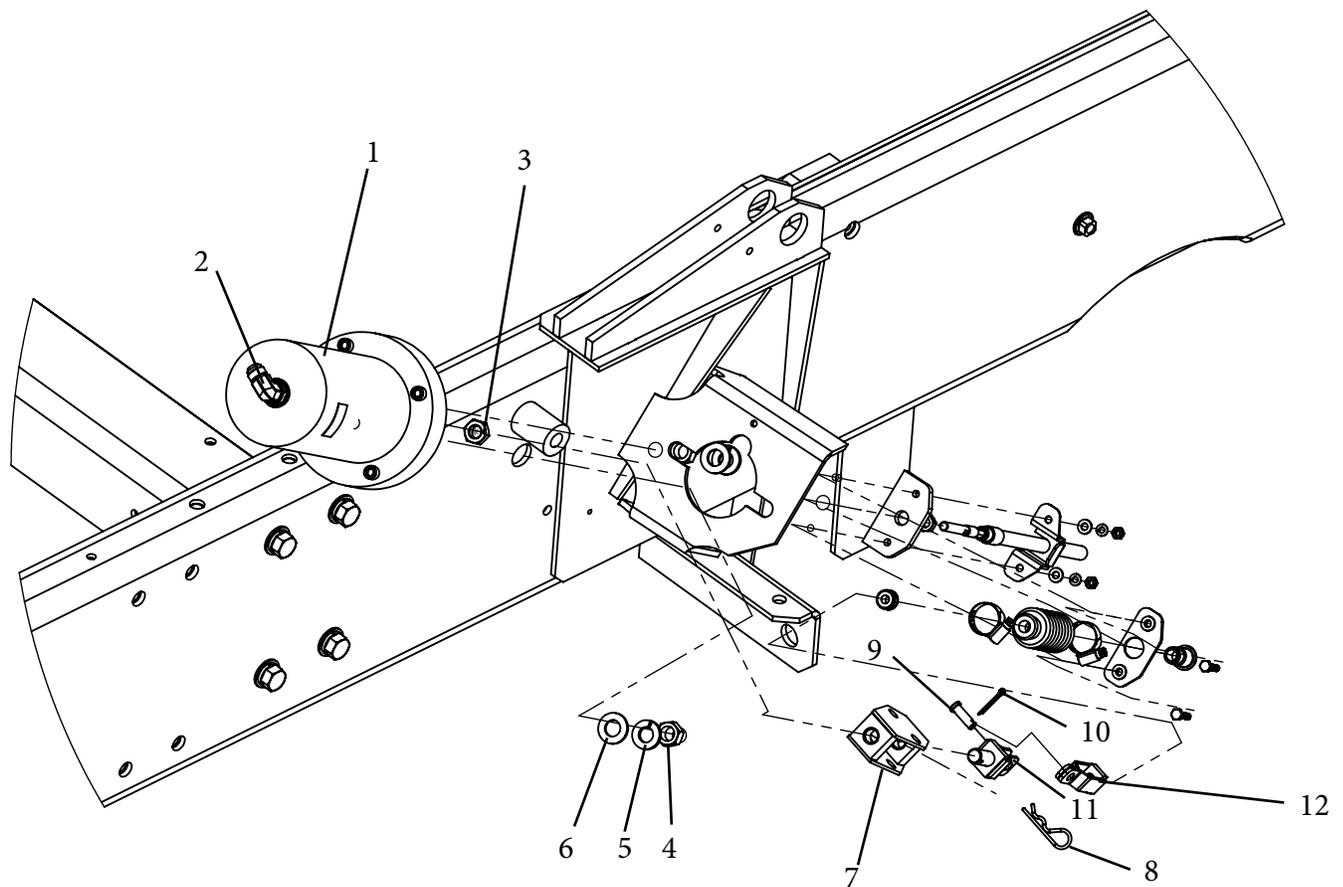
A *The Parking Brake Actuator is located in front of the left rear fender. Do not cut into, disassemble or torch the canister. The spring is under compressed force. The actuator canister is not repairable and must be replaced if a failure occurs.
